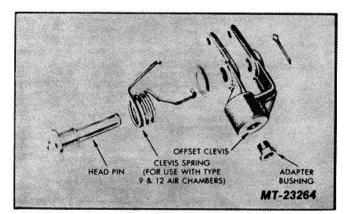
Offset Clevis Assembly used with Type 9 and 12 Air Chambers
